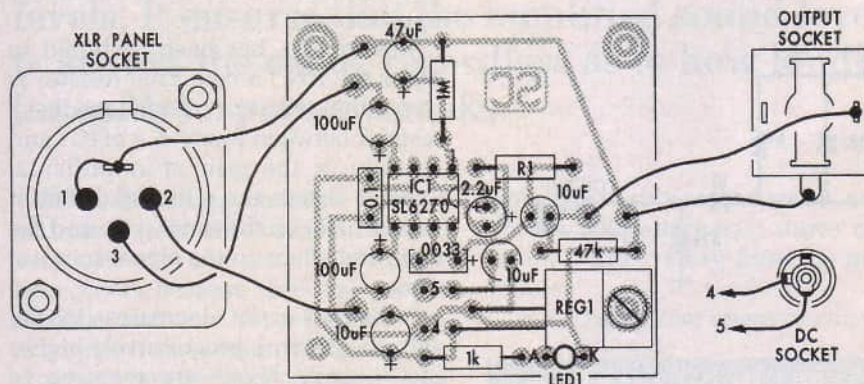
install the parts on the PC board & complete the wiring as shown here. Note that the LED is mounted with its top 25mm above the board surface, so that it will later just protrude through a hole in the lid.
